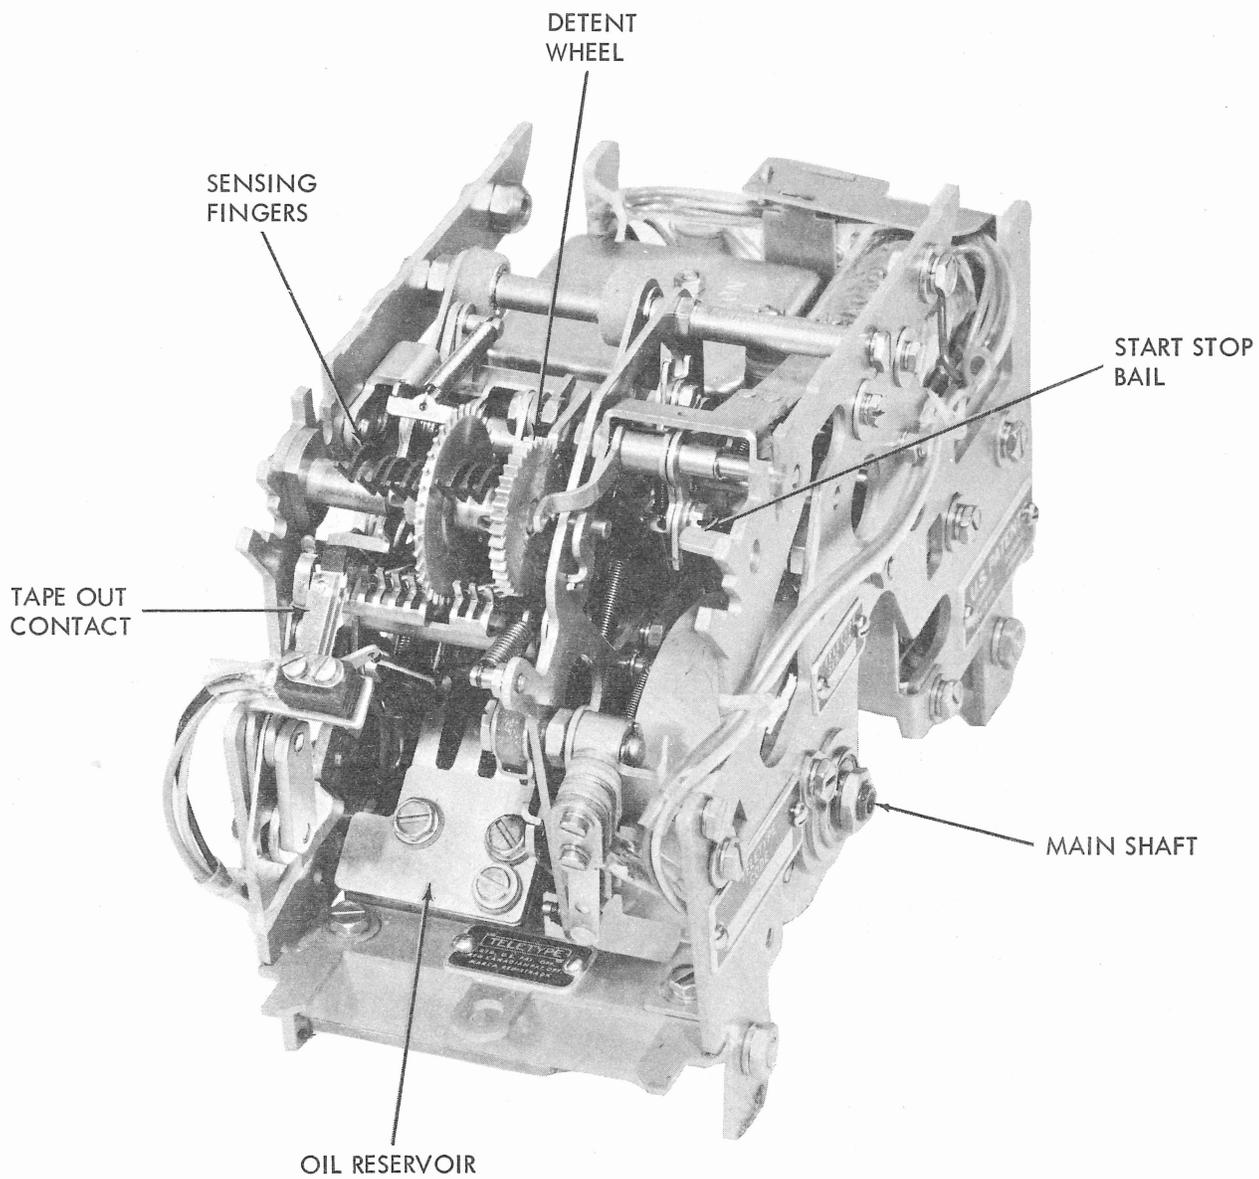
Transmitter Distributor, Covers Removed (End View)
